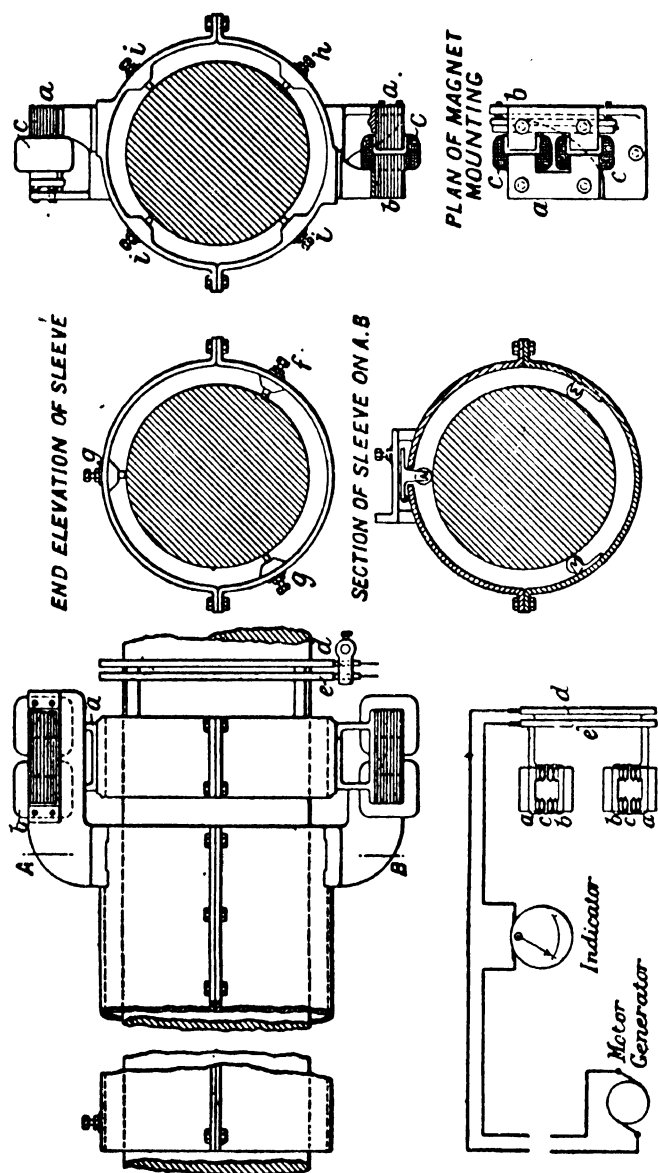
Illustrating the principle and constructional details of the Moullin torsionmeter.
